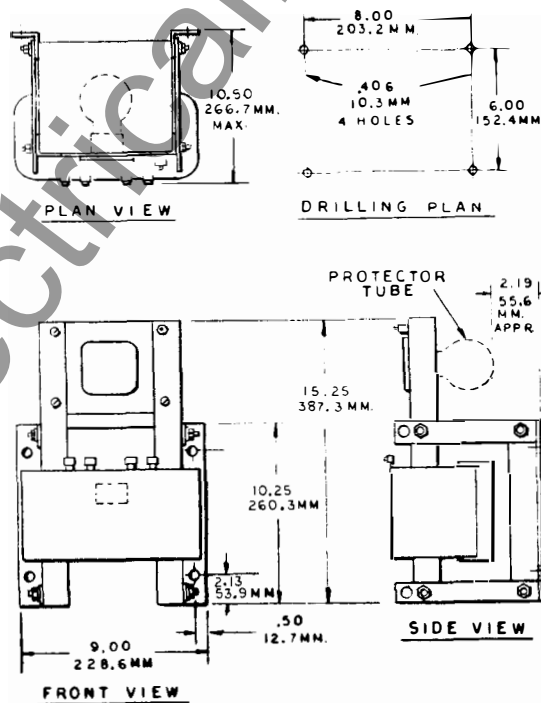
B (0275A2044 Sh.2) Outline and Mounting Dimensions for 50 Hertz Neutralizing Reactor
